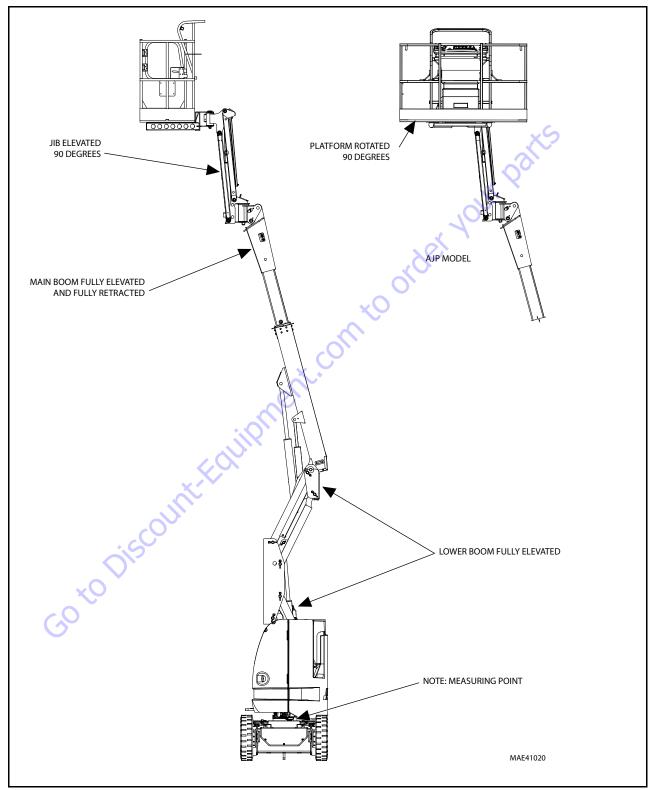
Swing Bearing Tolerance Boom Placement
